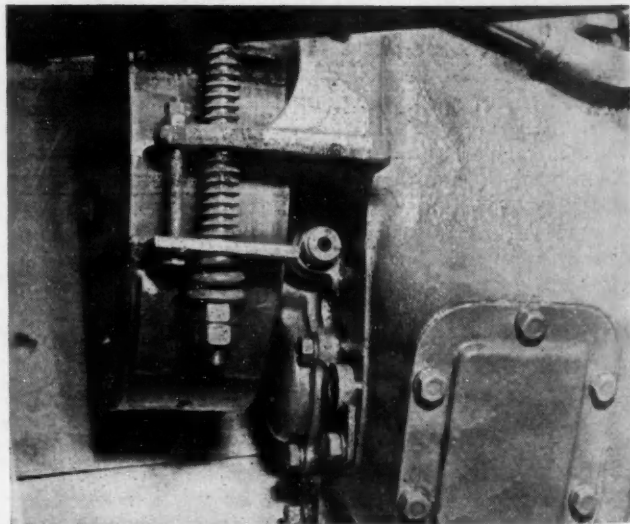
In this case the flexible shaft adapter is inaccessibly located between transmission housing and emergency brake drum assembly. This small space makes it hard for the mechanic to tighten the shaft properly so that undue wear and loss of lubricant results. And the sharp bend necessary to get around the housing probably would further induce early failure
